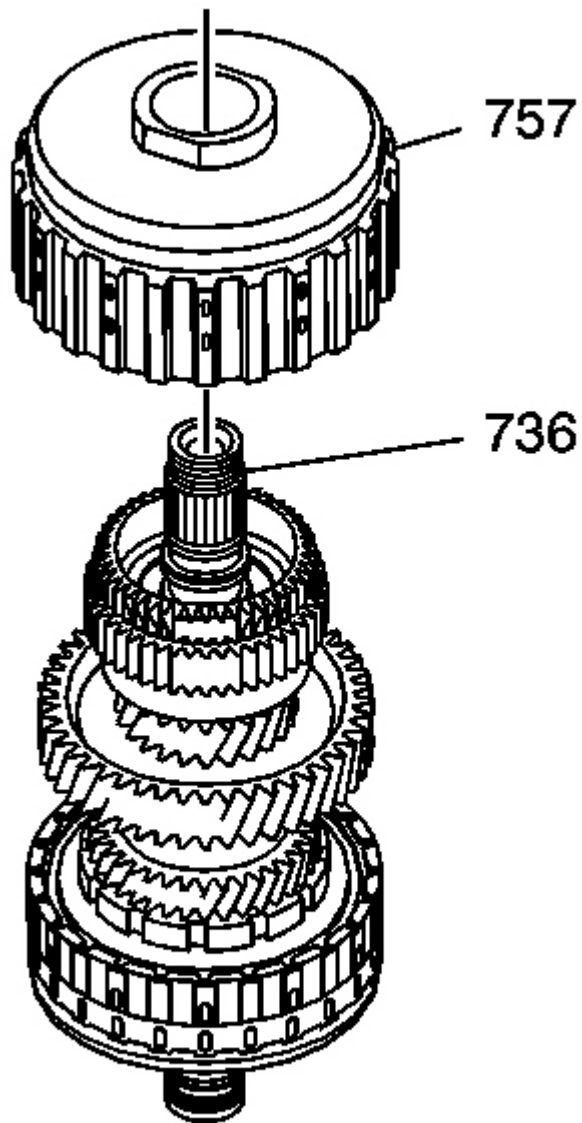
1st Coast Clutch Assembly & 1st And 2nd Clutch Shaft
